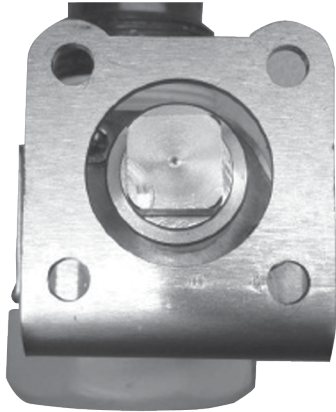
Coupler Installation For Size 1-1/4-inch Rotary Actuator
